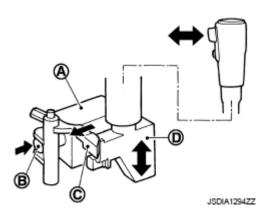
Identifying Shift Lock Solenoid, Solenoid Rod And Connecting Lock Lever Courtesy of NISSAN MOTOR CO., U.S.A.
